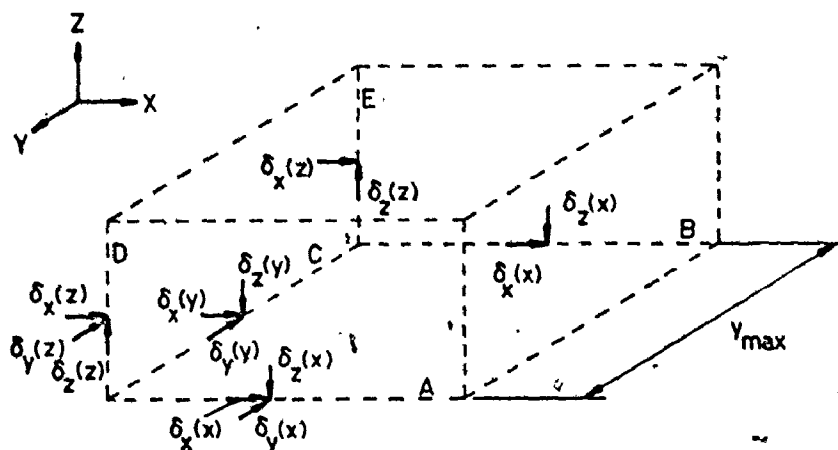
The Minimum number of Translative Deviations to be Measured on the Skin-Milling Machine, with a Limitation to Flat Workpieces.
